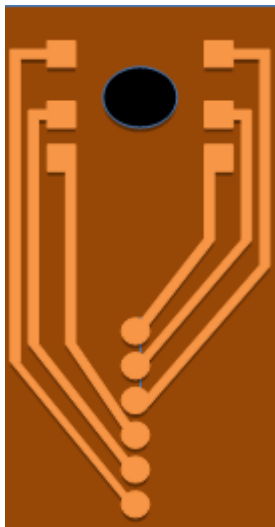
PCB Layout with Drilled Holes and Top Hole for Diaphragm Placement
